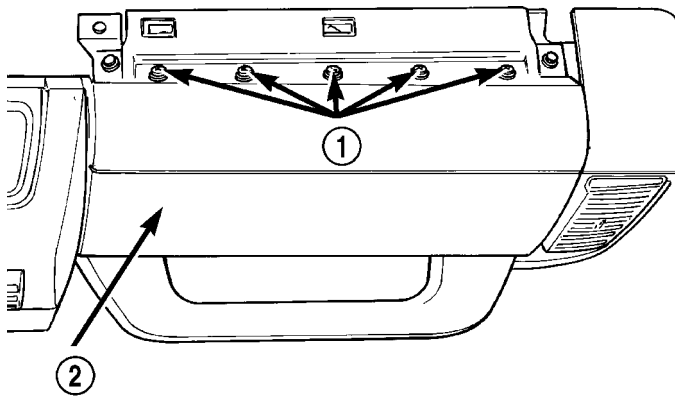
Passenger Airbag Door Upper Flange Remove/Install
